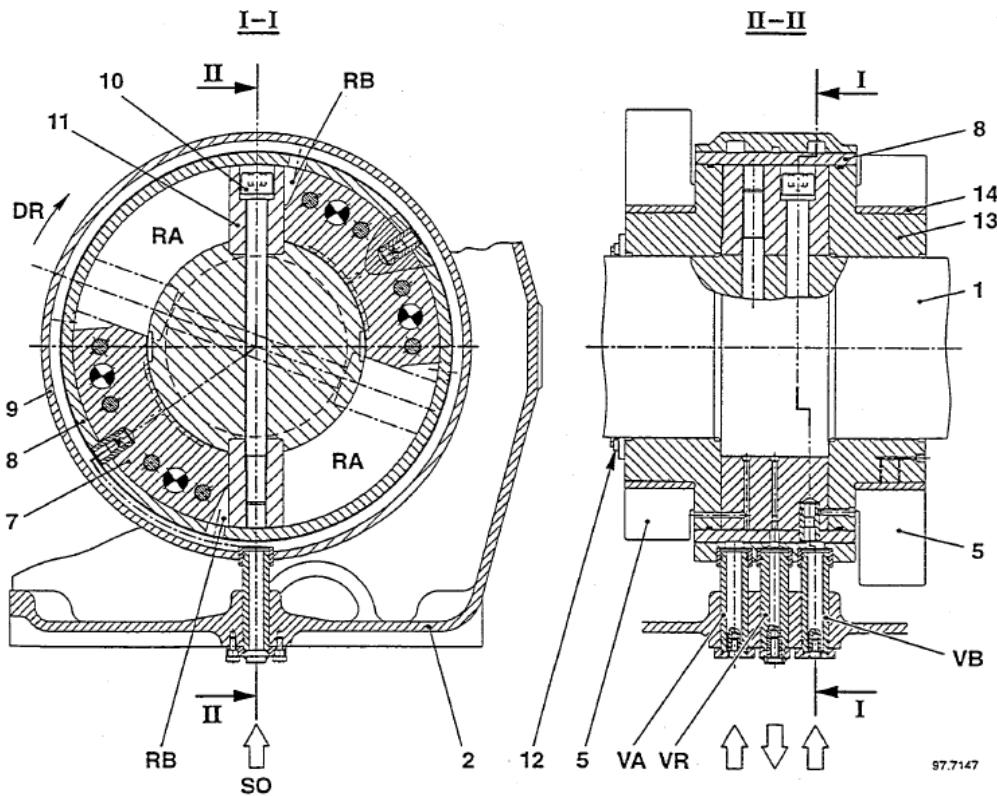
Cross sectional view of Reversing servomotor for SULZER RTA96C engine
